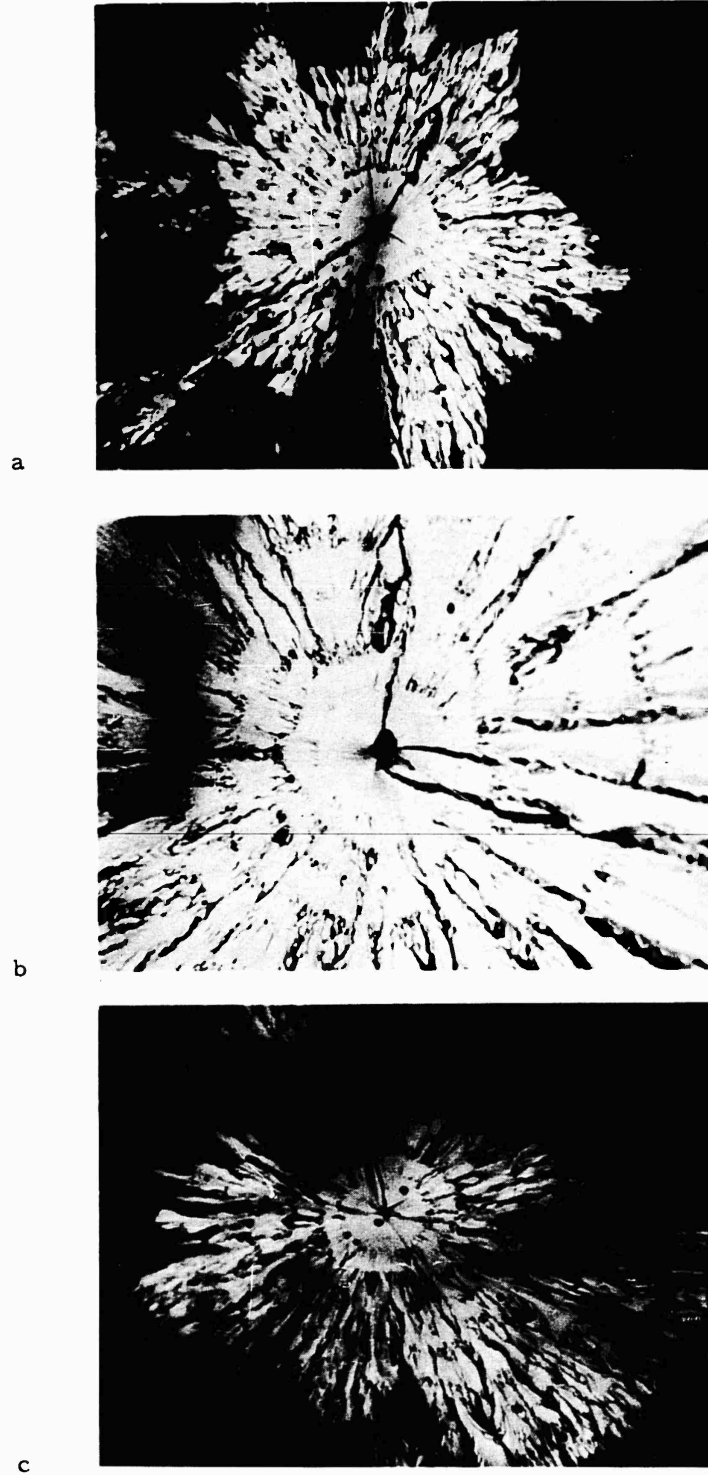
Free Surfaces of Fractures From Impacted BC-326. Shot #1023.
